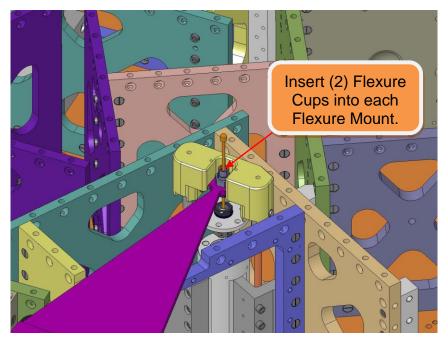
Preparing to clamp the Flexure Assemblies to Stage 0 and Stage 1: start by inserting (2) Flexure Cups into each Flexure Mount.
